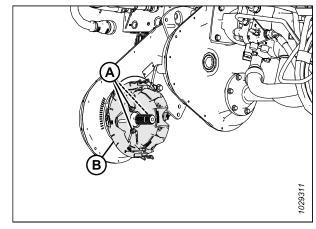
Completion Gearbox Chain Tensioner Cover
